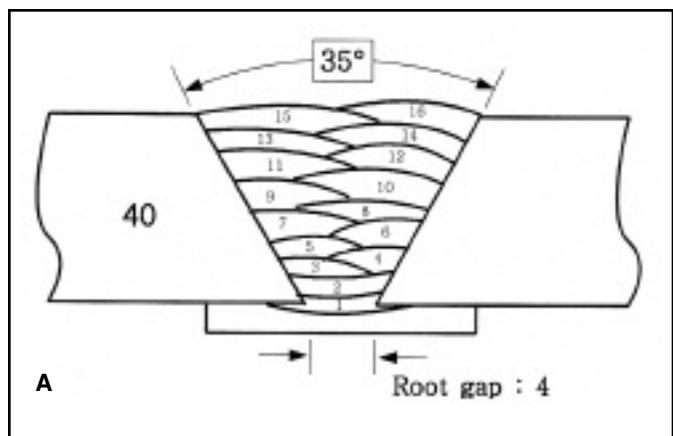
Schematic diagram of weld metal deposit.
